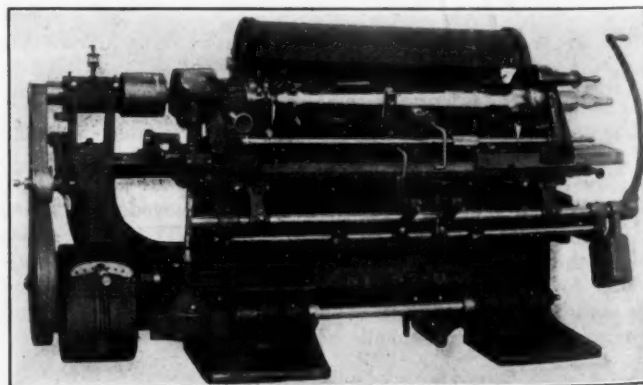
HOLLOW-CHUCK ATTACHMENT ON SHAPING LATHE FOR LONG, SLENDER TURNINGS
